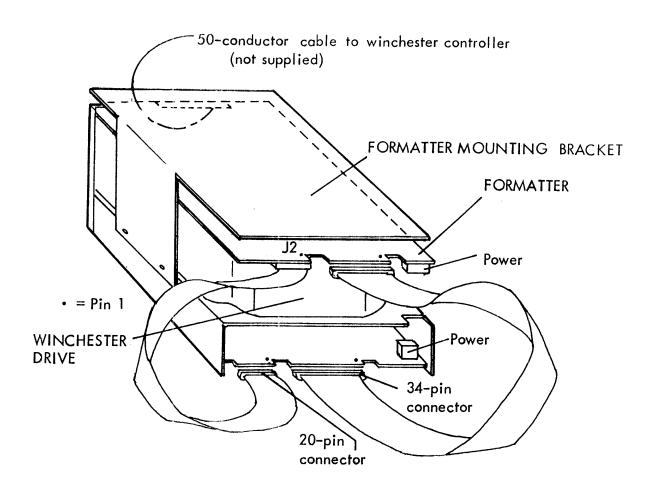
WINCHESTER DRIVE/FORMATTER CABLE CONNECTIONS
